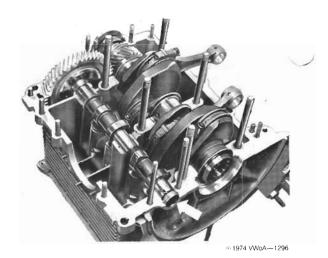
Camshaft end plug (arrow) installed in left half of crankcase.
